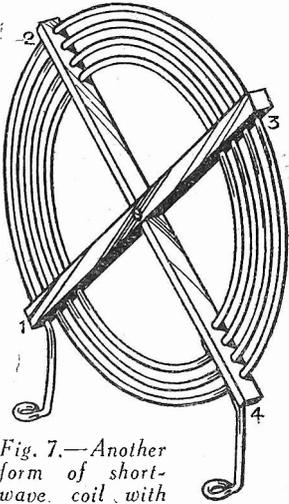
Another form of short-wave coil with dimensions of fixing strips.
